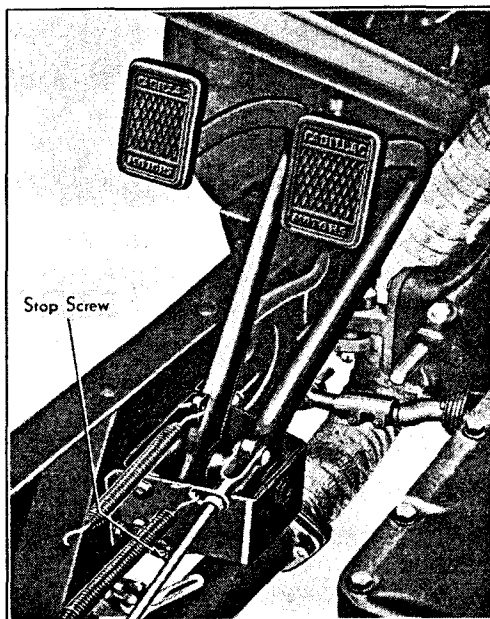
Series 10 and 20 Cadillac pedal assembly, showing clutch pedal stop screw.
